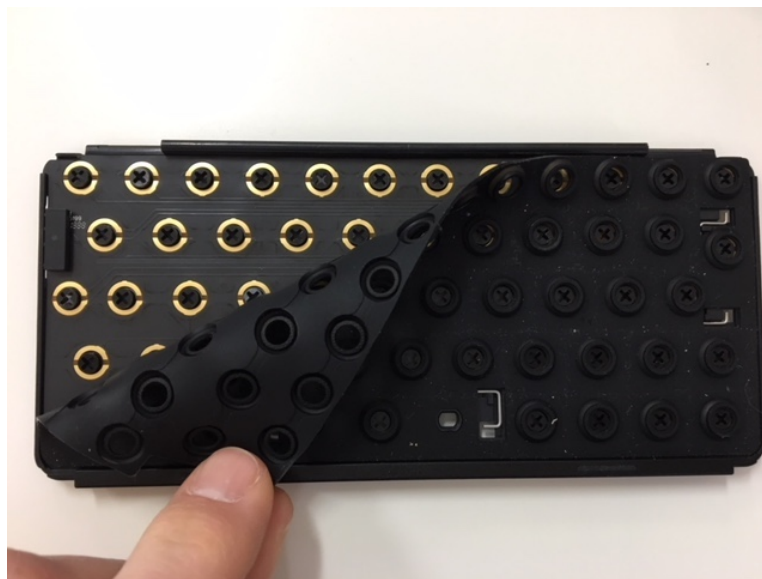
Photo illustrating the removal of the keyboard mat exposing the keyboard flexi.
